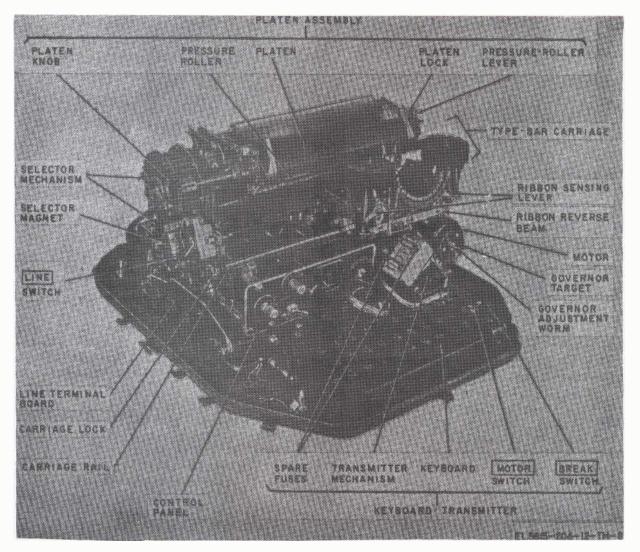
Teletypewriter TT-4(*)/TG, dust cover removed, front-left-side view
